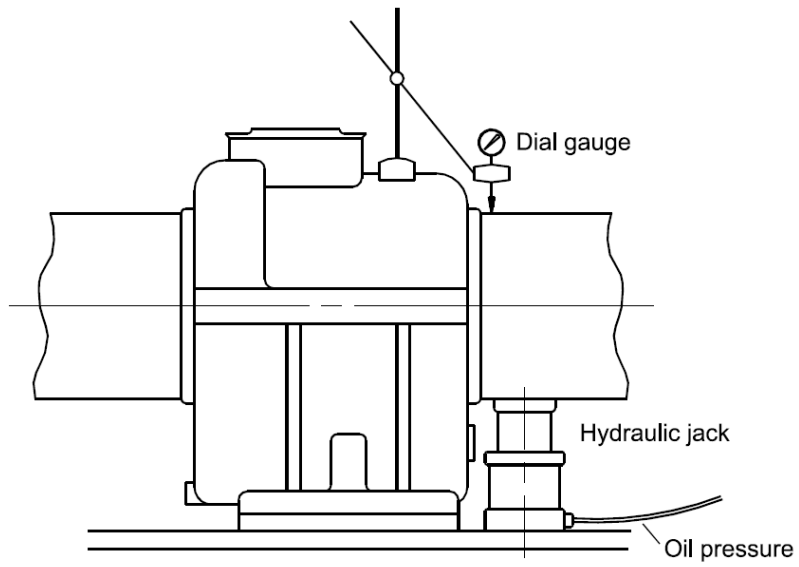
Reaction measurement of intermediate shaft bearing
